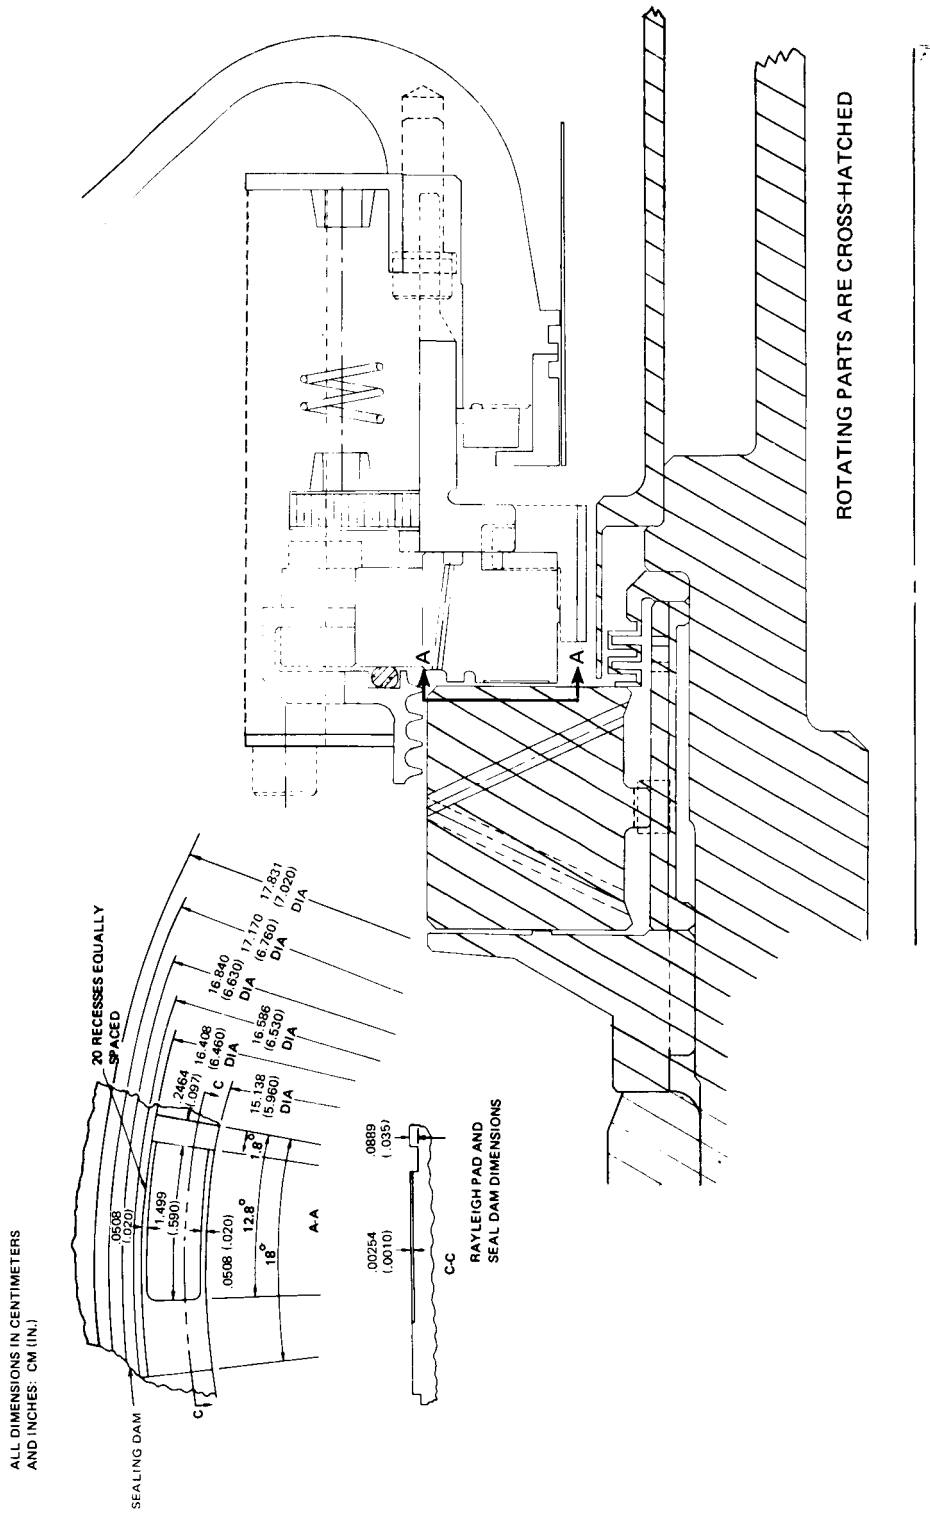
Gas-Film Seal Design Shown on NASA Drawing CF-849668
